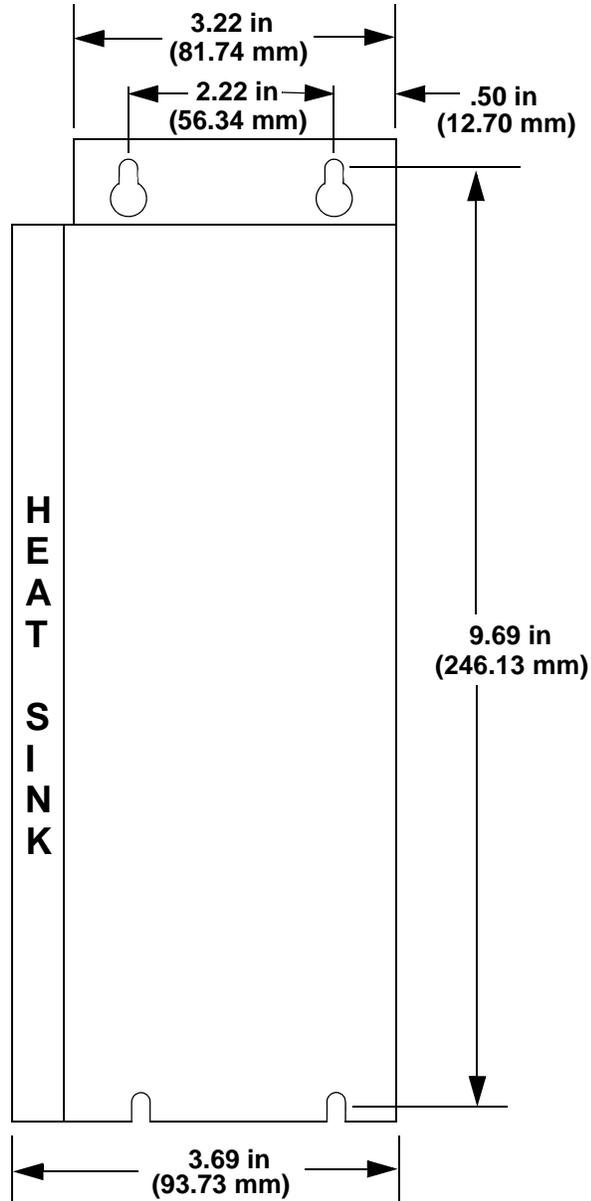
1 kW & 2 kW Narrow Drive (-DN) - Front View
